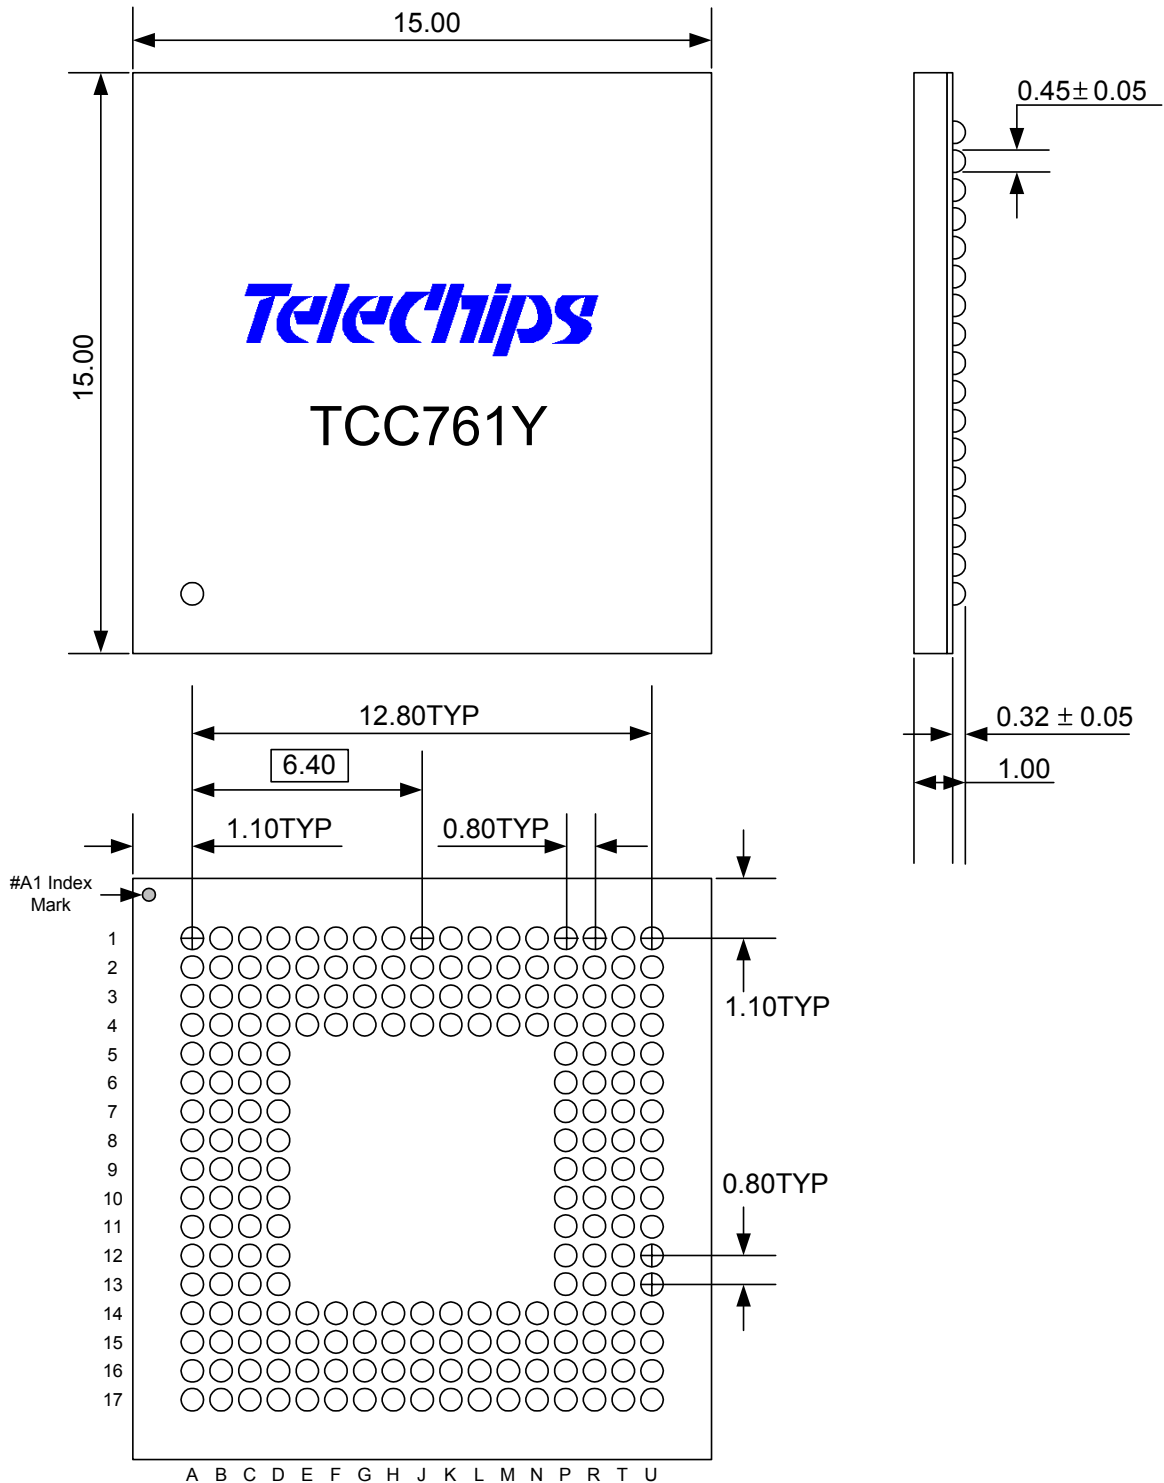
TCC761-Y Package Dimension (208-TBGA-1515)
